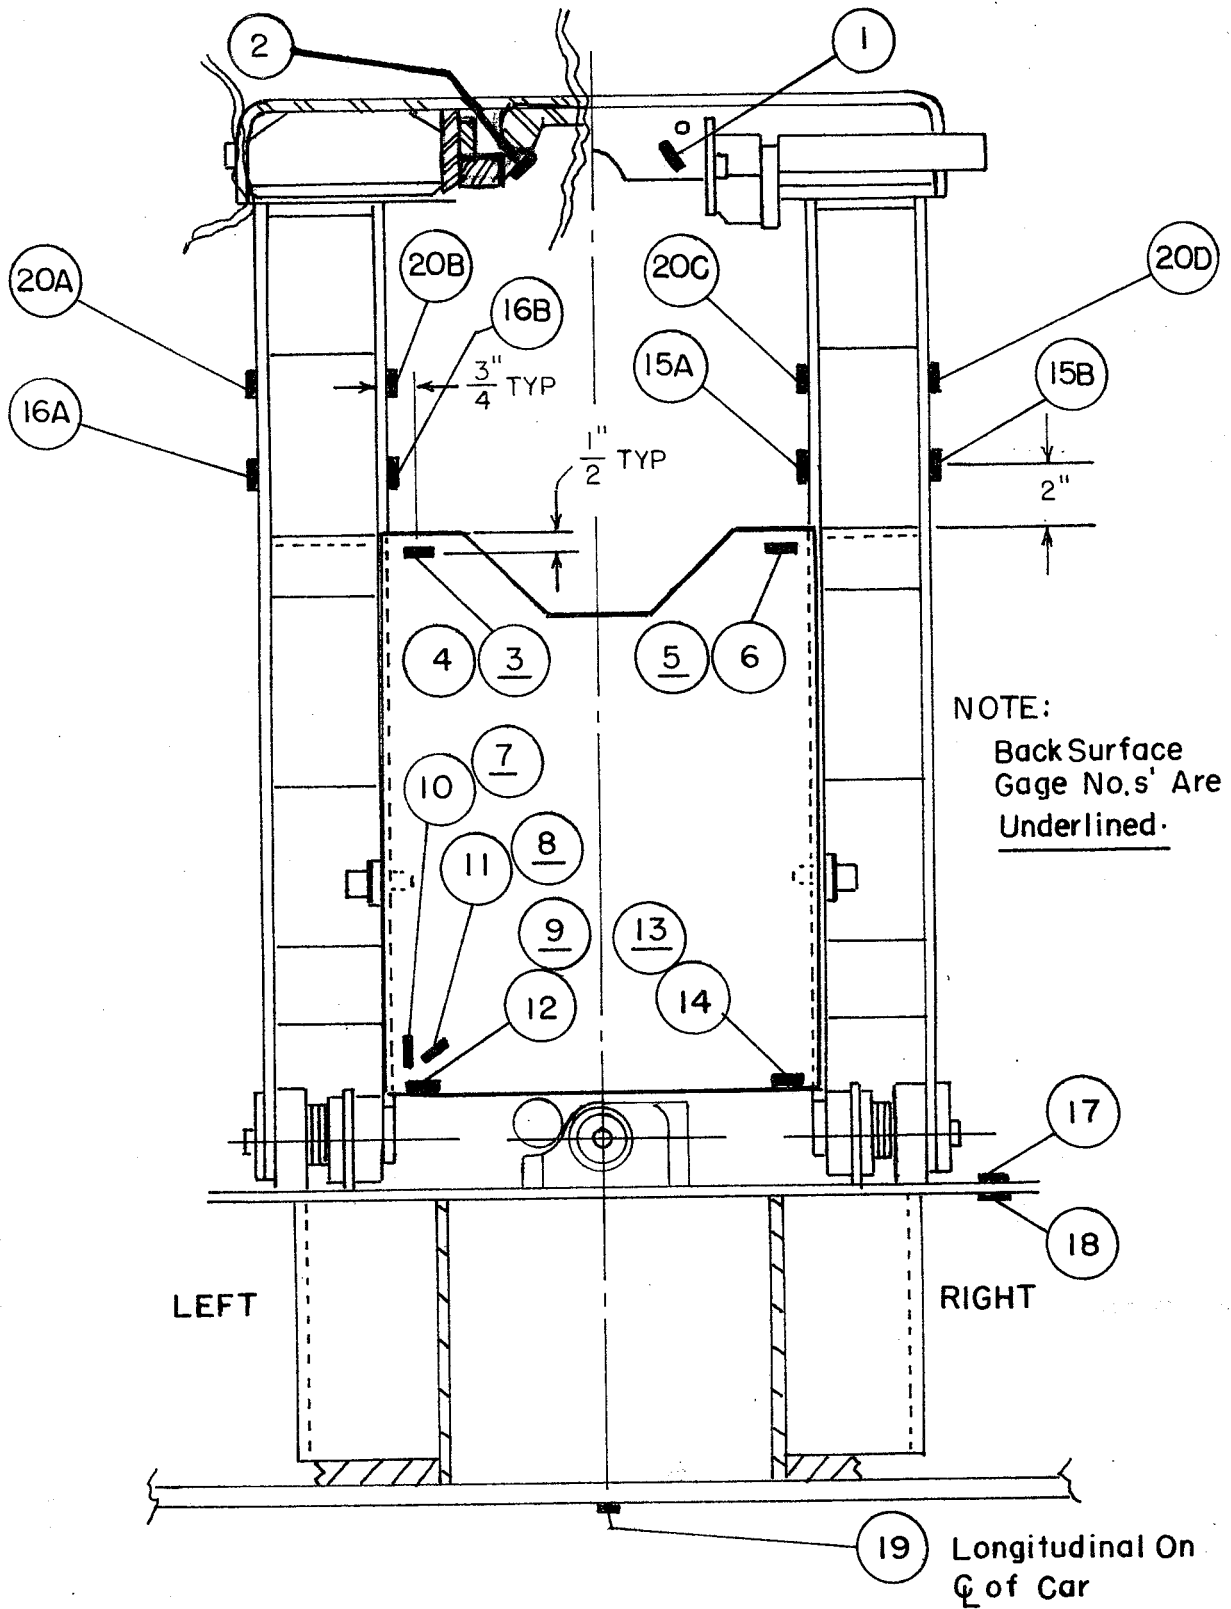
GAGE LOCATIONS, FRONT VIEW ELEVATED.
